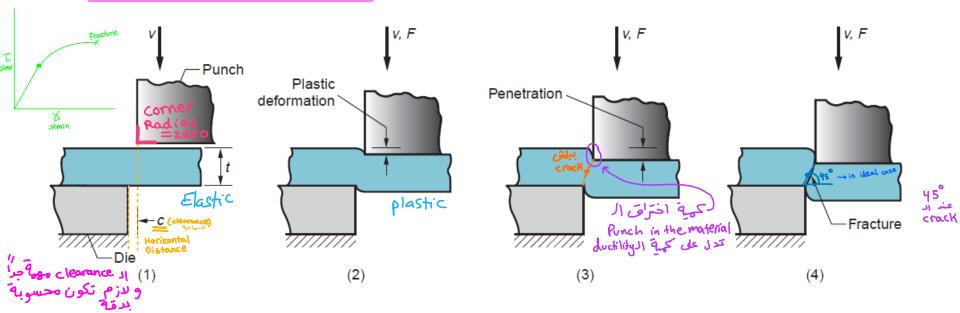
Shearing of sheet metal between two cutting edges: (1) just before the punch contacts work; (2) punch begins to push into work, causing plastic deformation; (3) punch compresses and penetrates into work causing a smooth cut surface; and (4) fracture is initiated at the opposing cutting edges that separate the sheet. Symbols *v* and *F* indicate motion and applied ⁵ force, respectively, *t* = stock thickness, *c* = clearance.
